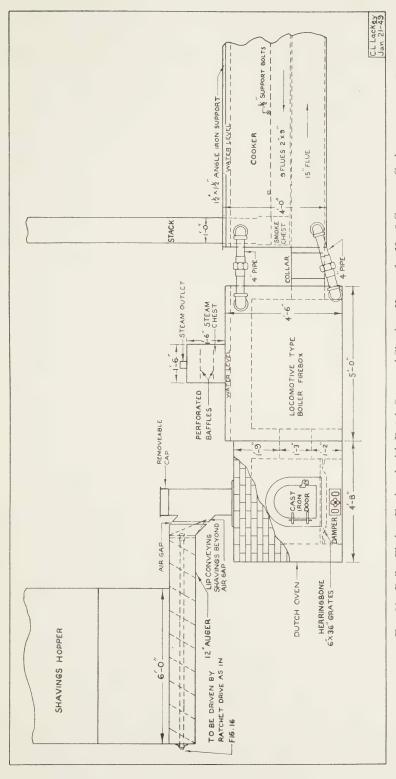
Large Sawdust Burner for No. 2 Cannery, showing Side Elevation, Section and Plan of Top
